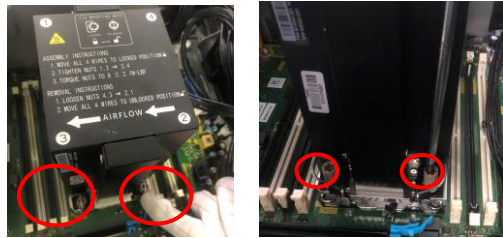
Disconnect the cooler cable from MB and remove the cooler.
